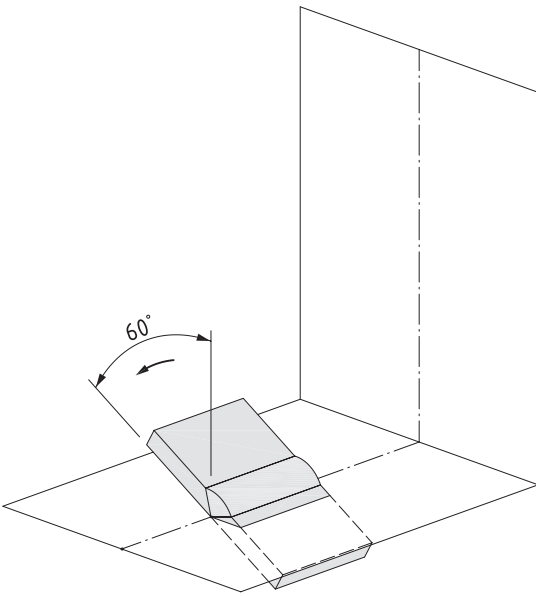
Welding position PA slope and rotation limits for butt welds
